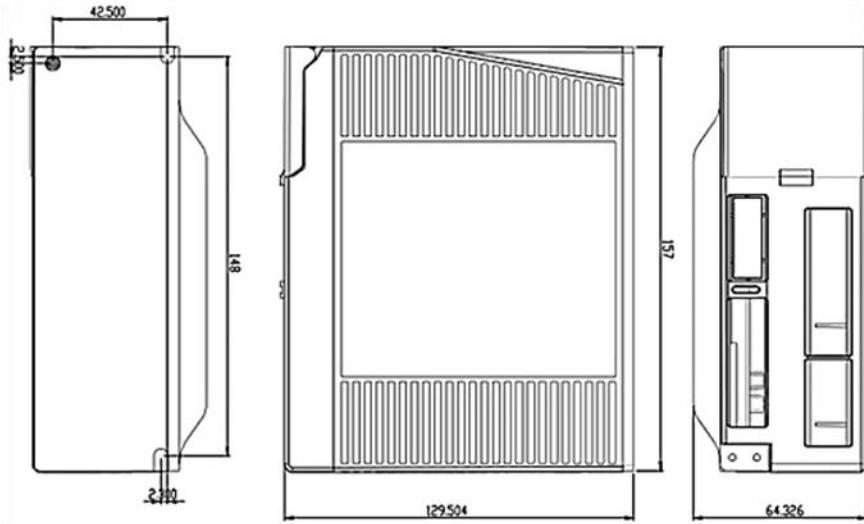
mechanical installation dimension drawing of JMC 2HSS858-EC
